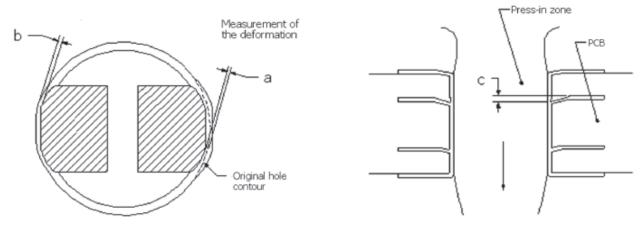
Transverse and Longitudinal Cross-Sectioning Measurement Locations
